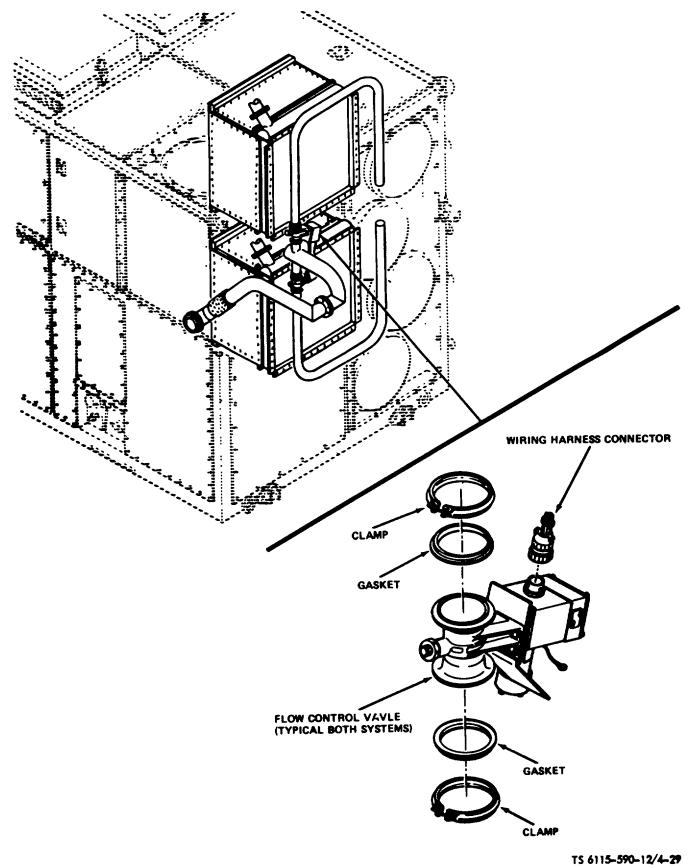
Flow Control Valves Replacement (TS 6115-59012/4-29) 4-74
